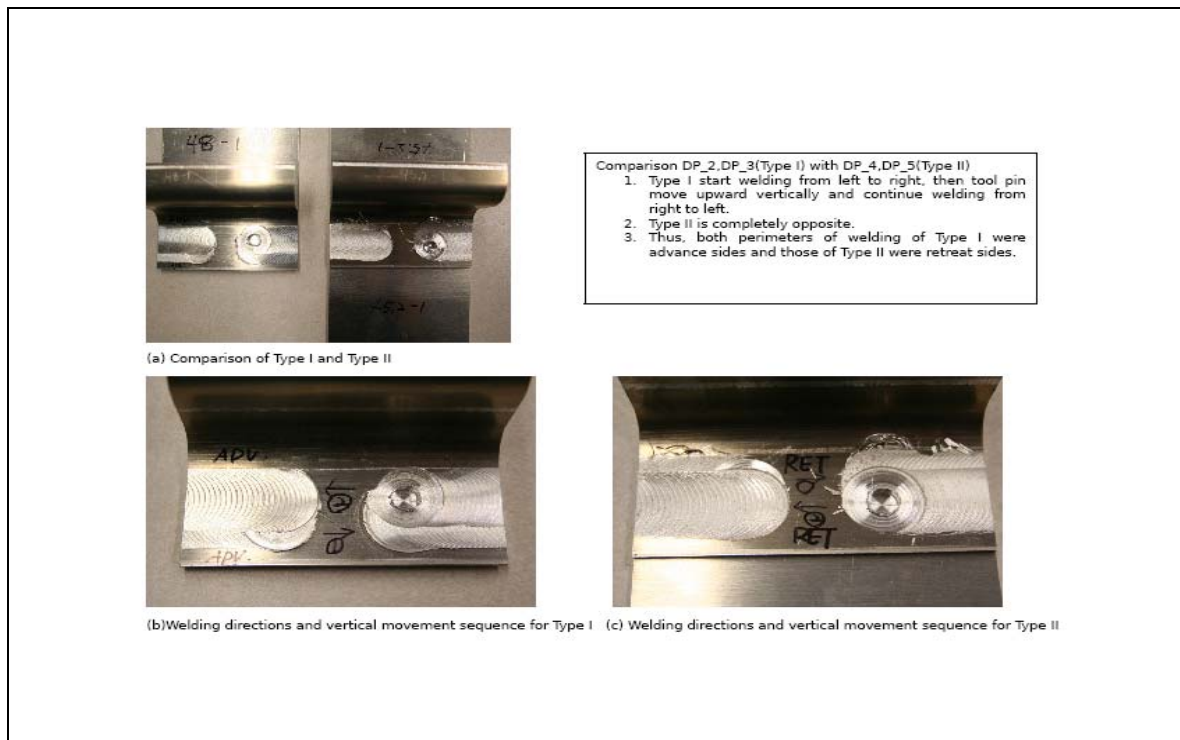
Double Pass Type I and Type II Welding Procedure
